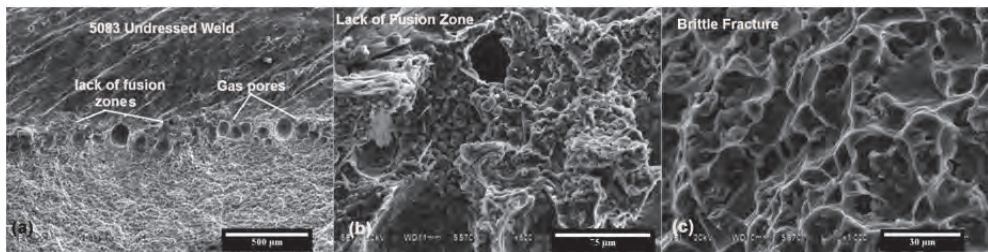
Typical tensile fracture surfaces of undressed welds failing at weld/HAZ transition zone (a) lack of fusion and gas pores in weld/HAZ interface, (b) lack of fusion area; and (c) brittle mixed-mode failure in weld/HAZ interface.
